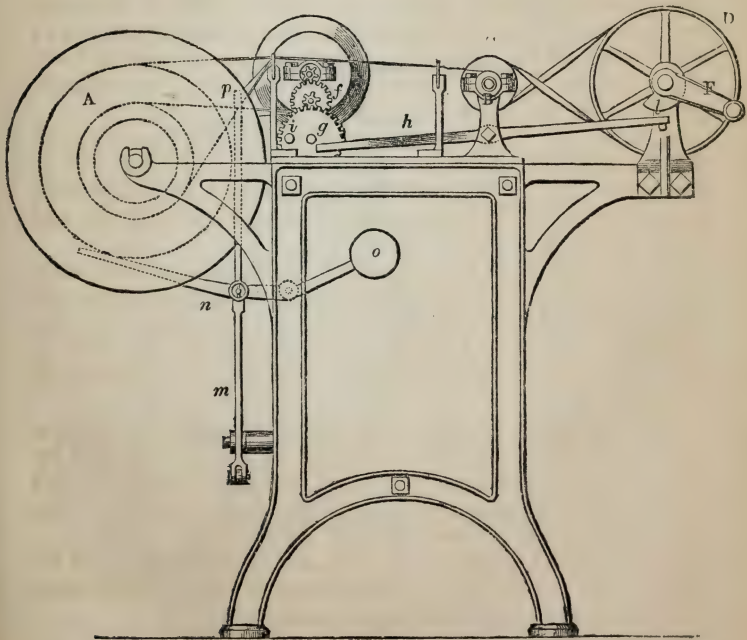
Bobbin-filling Machine. Side View. Scale, about two inches to the foot.
